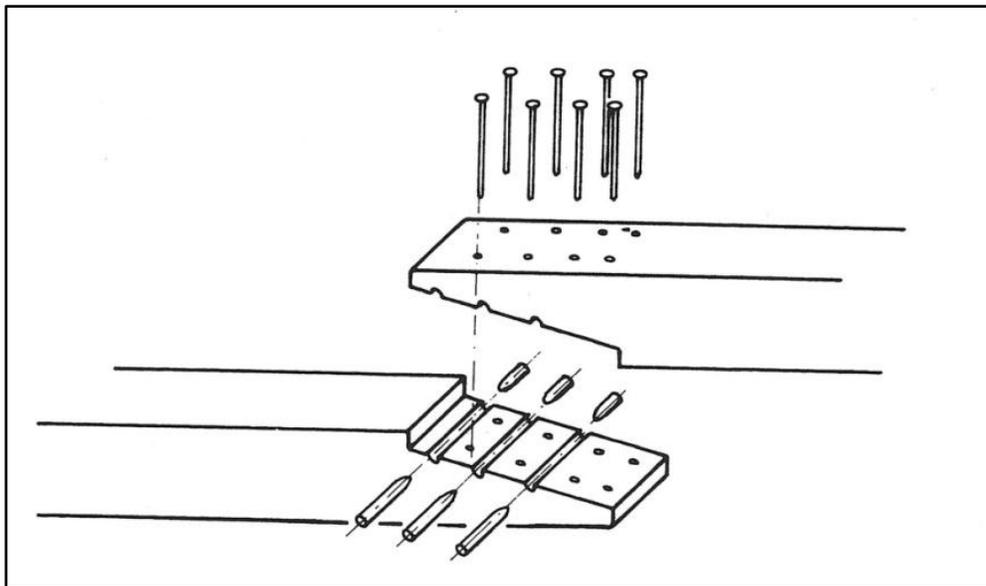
Detail drawing of a horizontal keel scarf. (By Hoving, 2012)
